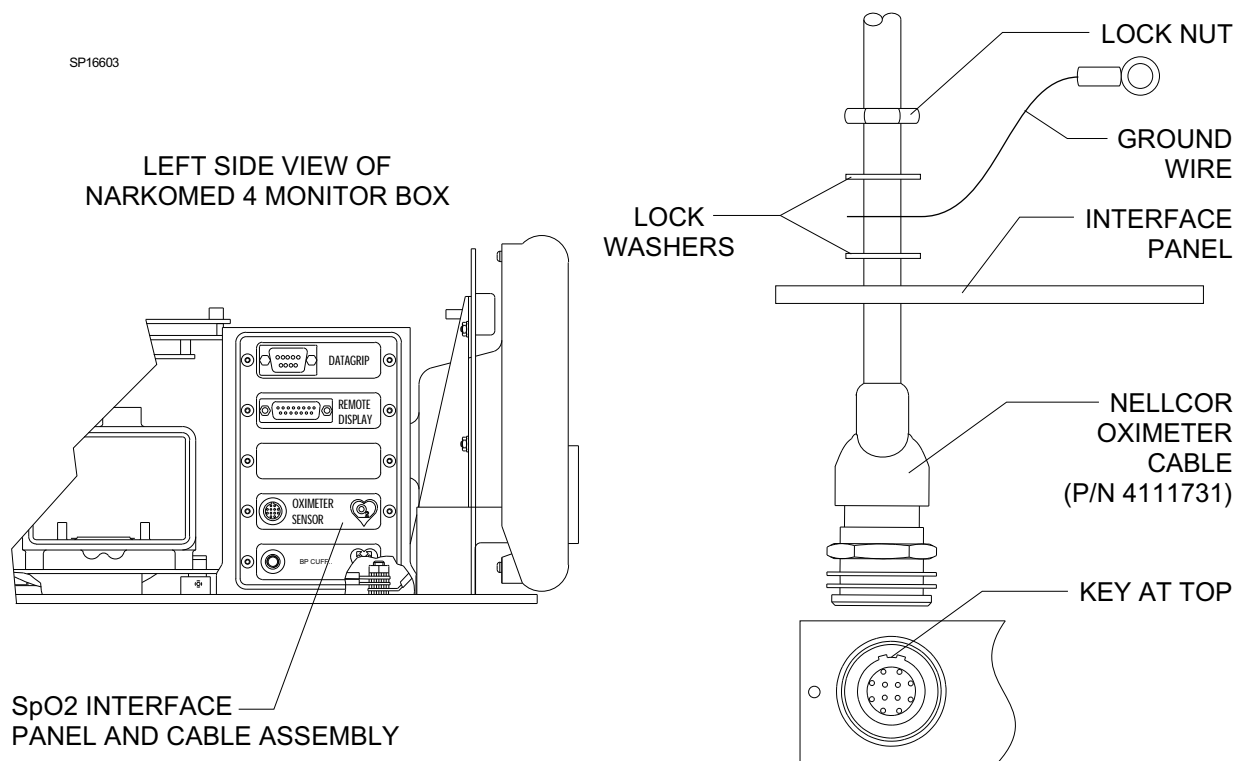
SpO₂ INTERFACE PANEL & CABLE ASSEMBLY
